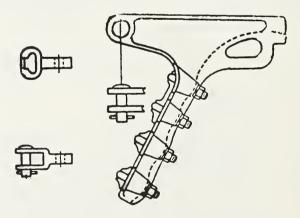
TYPICAL BOLTED DEADEND CLAMP
